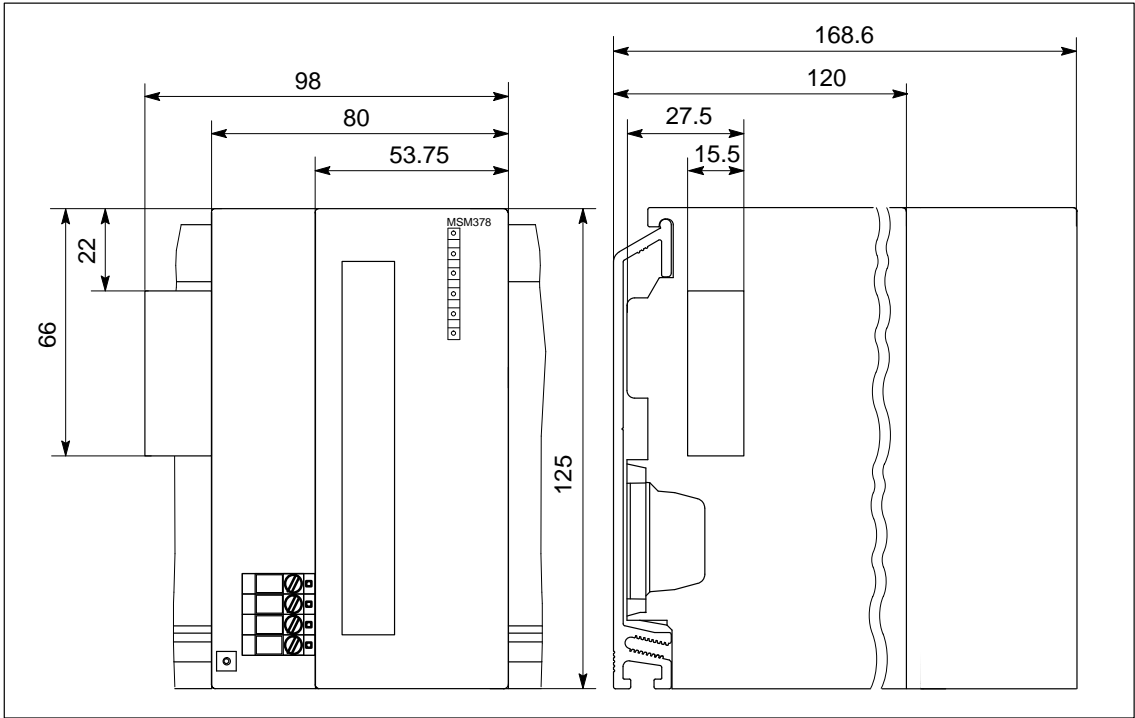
Dimension Drawing of Expansion Module MSM 378
